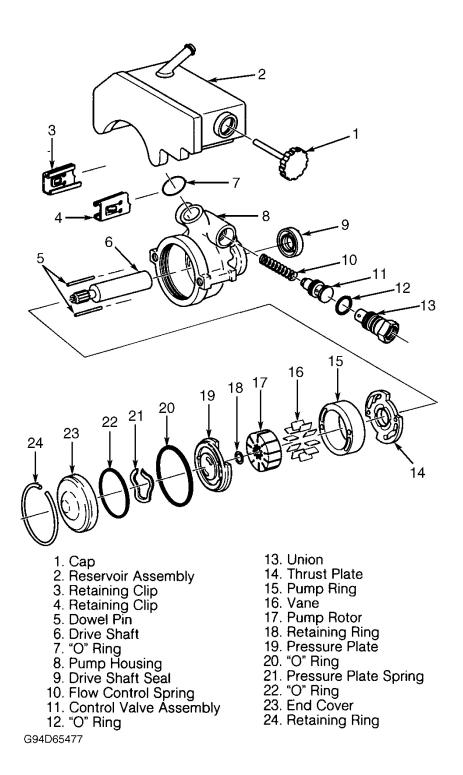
Exploded View Of Power Steering Pump (Model "CB") Courtesy of GENERAL MOTORS CORP.
